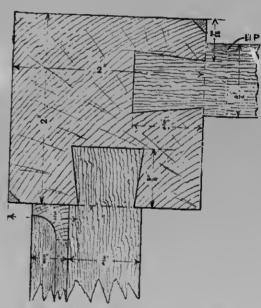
Section of Pillar and Dovetails of Side and Panels of Portable Desk.
